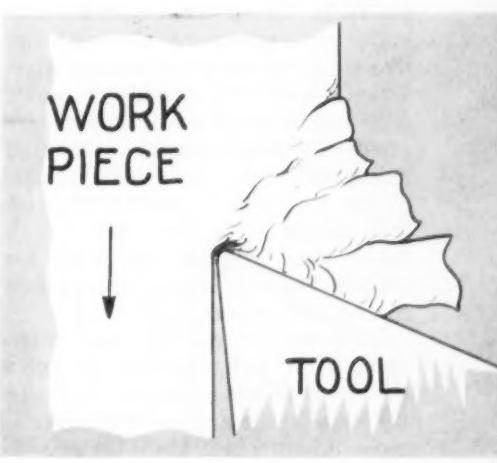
Cross-section of tool and steel work-piece shows how chip is removed by compression and rupture. Brittle chips like those shown in this sketch are removed with little tendency for a built-up edge to form on the tool.
